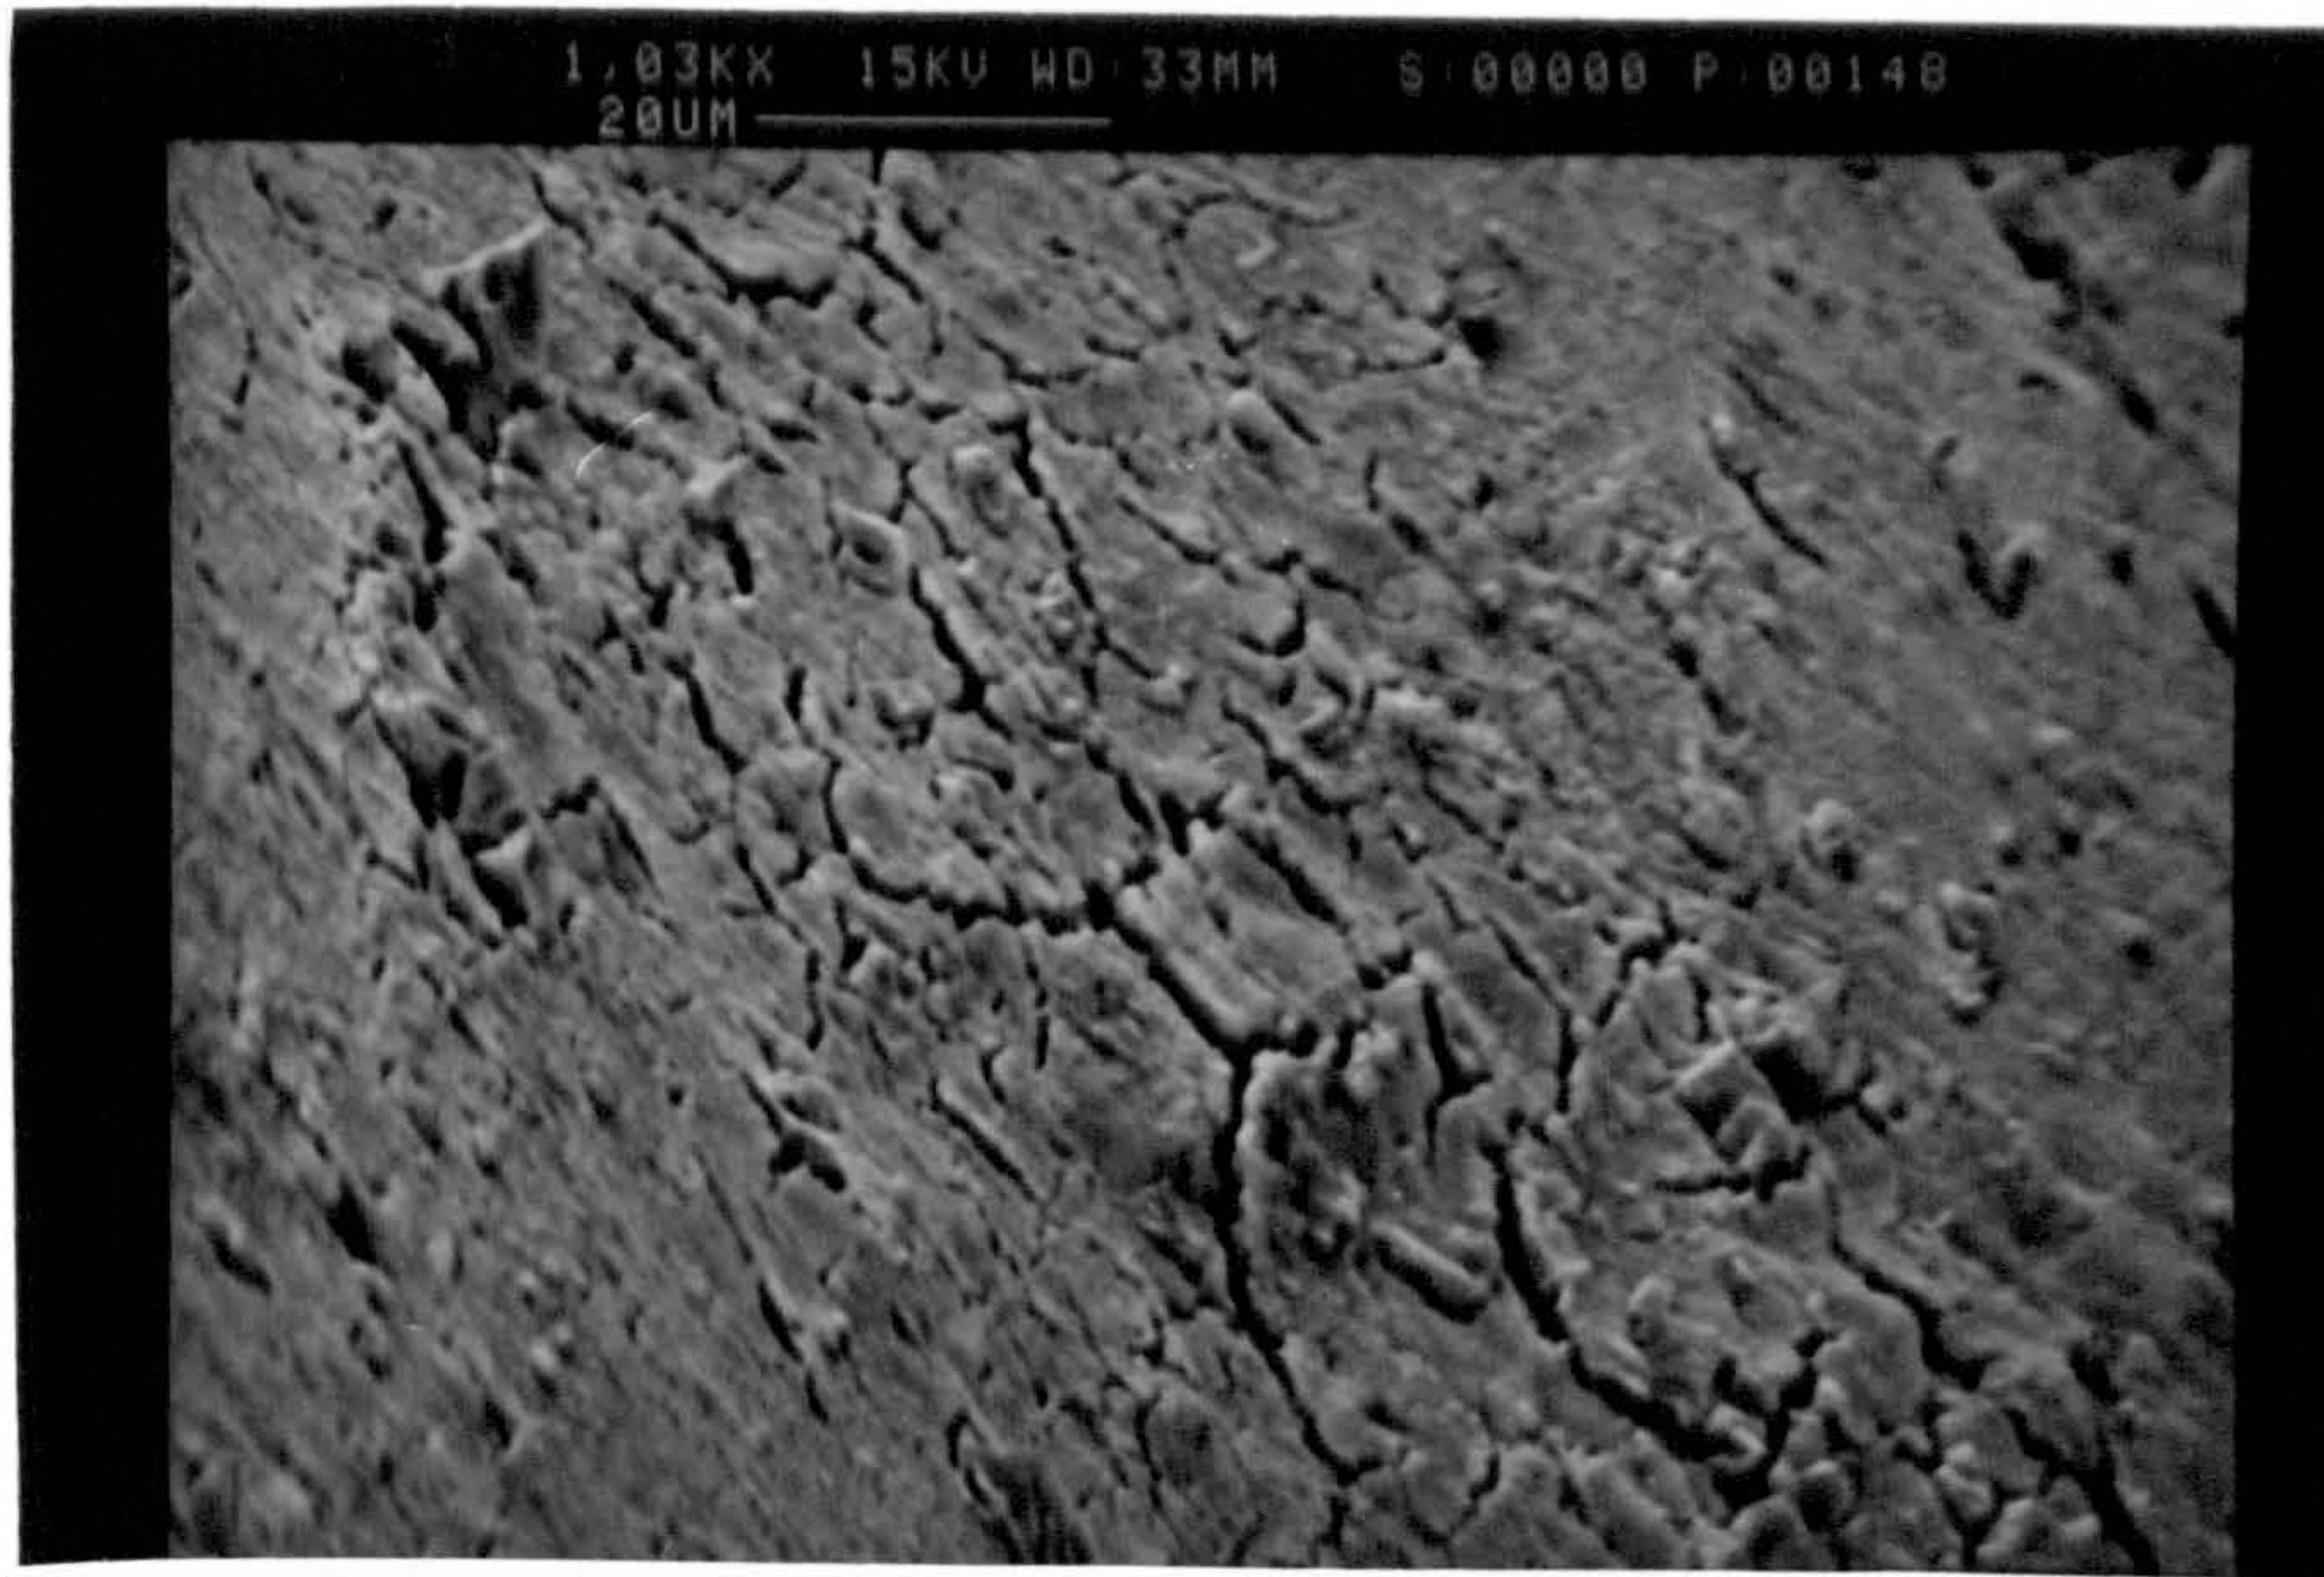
Cracking on the flank wear land of HSS tool.
